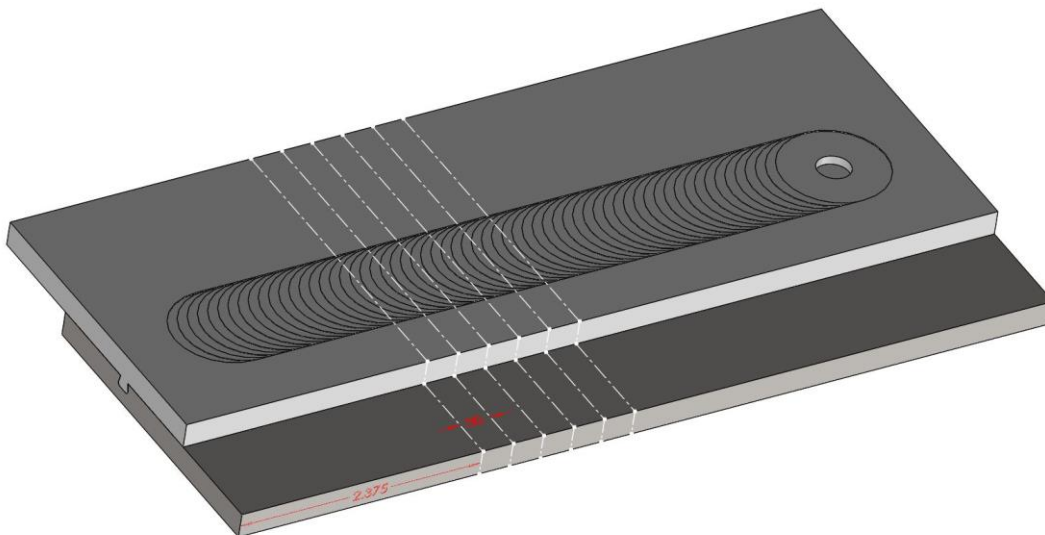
Model of an extrusion weld that demonstrates the location of the five samples taken for the IPC testing.
